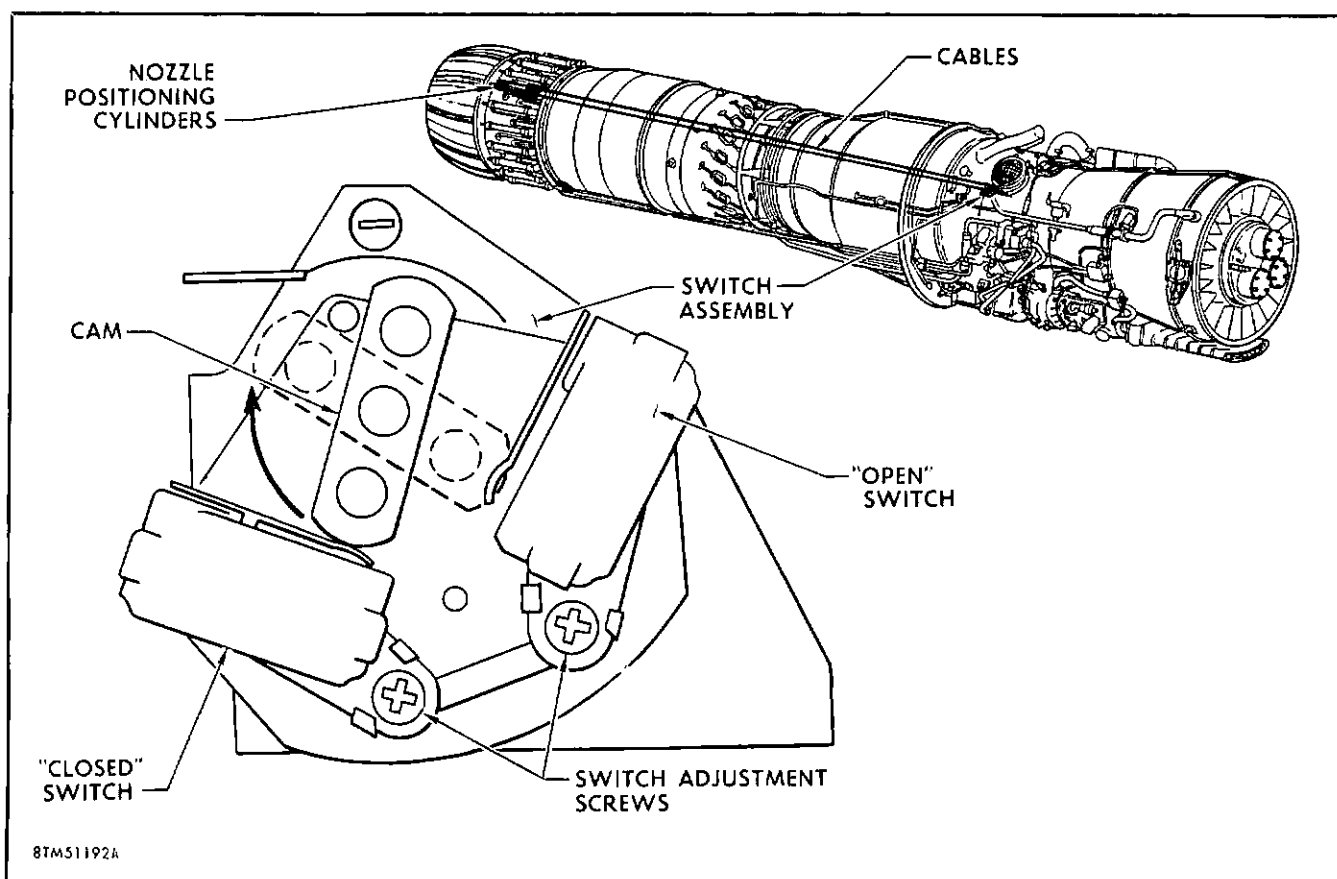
Afterburner Exhaust Nozzle Position Switches
